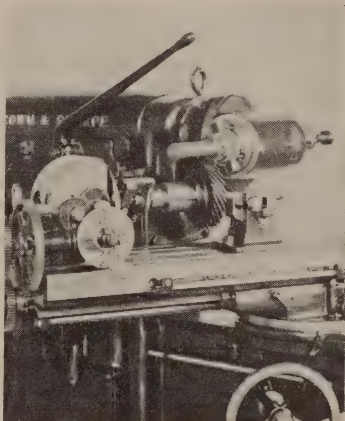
Cutting teeth in spiral gear with vertical attachment swung up 90 deg. and table swiveled to angle required.
